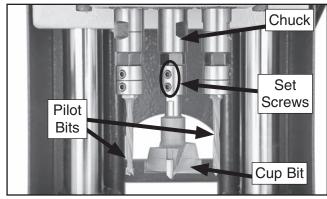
Chucks with boring bits installed (guard removed for clarity).
